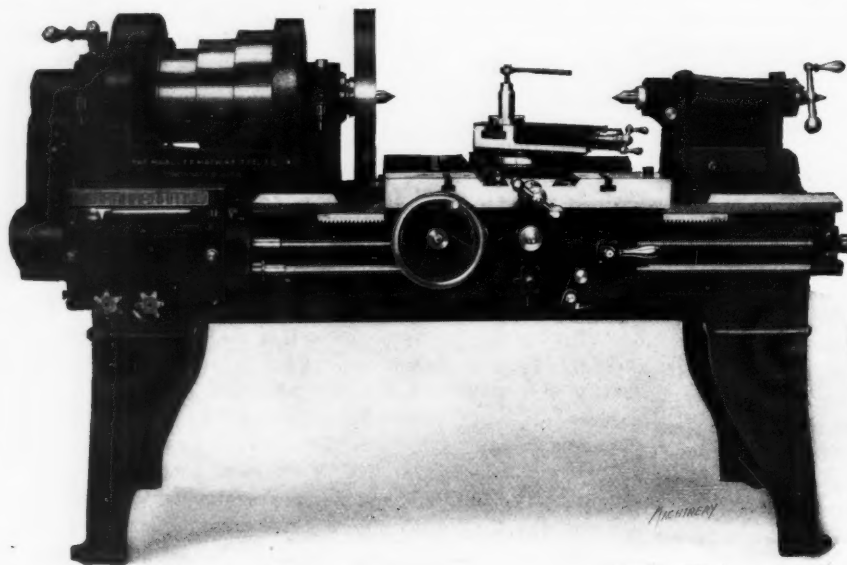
The Mueller 18-inch Heavy-duty Engine Lathe
